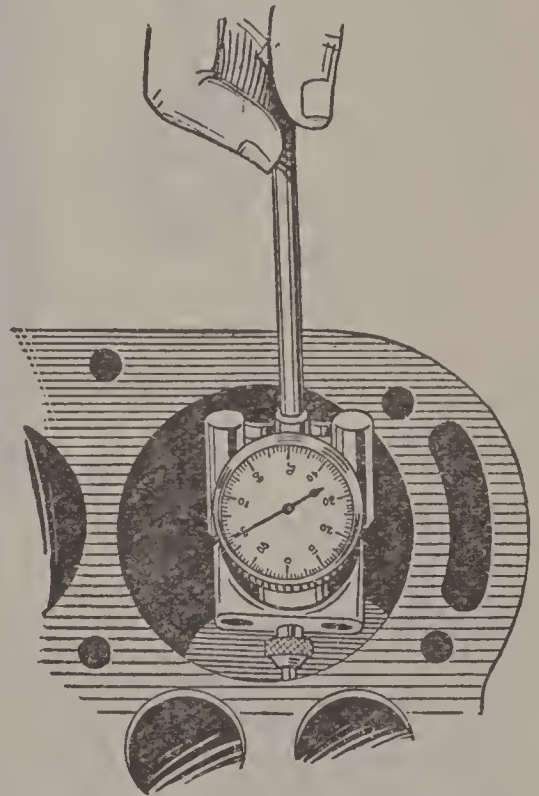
DIAL TEST INDICATOR USED ON CYLINDER REGRINDING JOB
